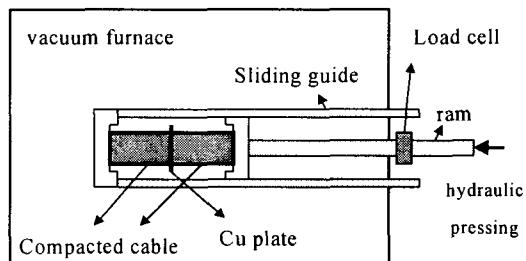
Schematic drawing of device for diffusion bonding the two terminal specimens.
